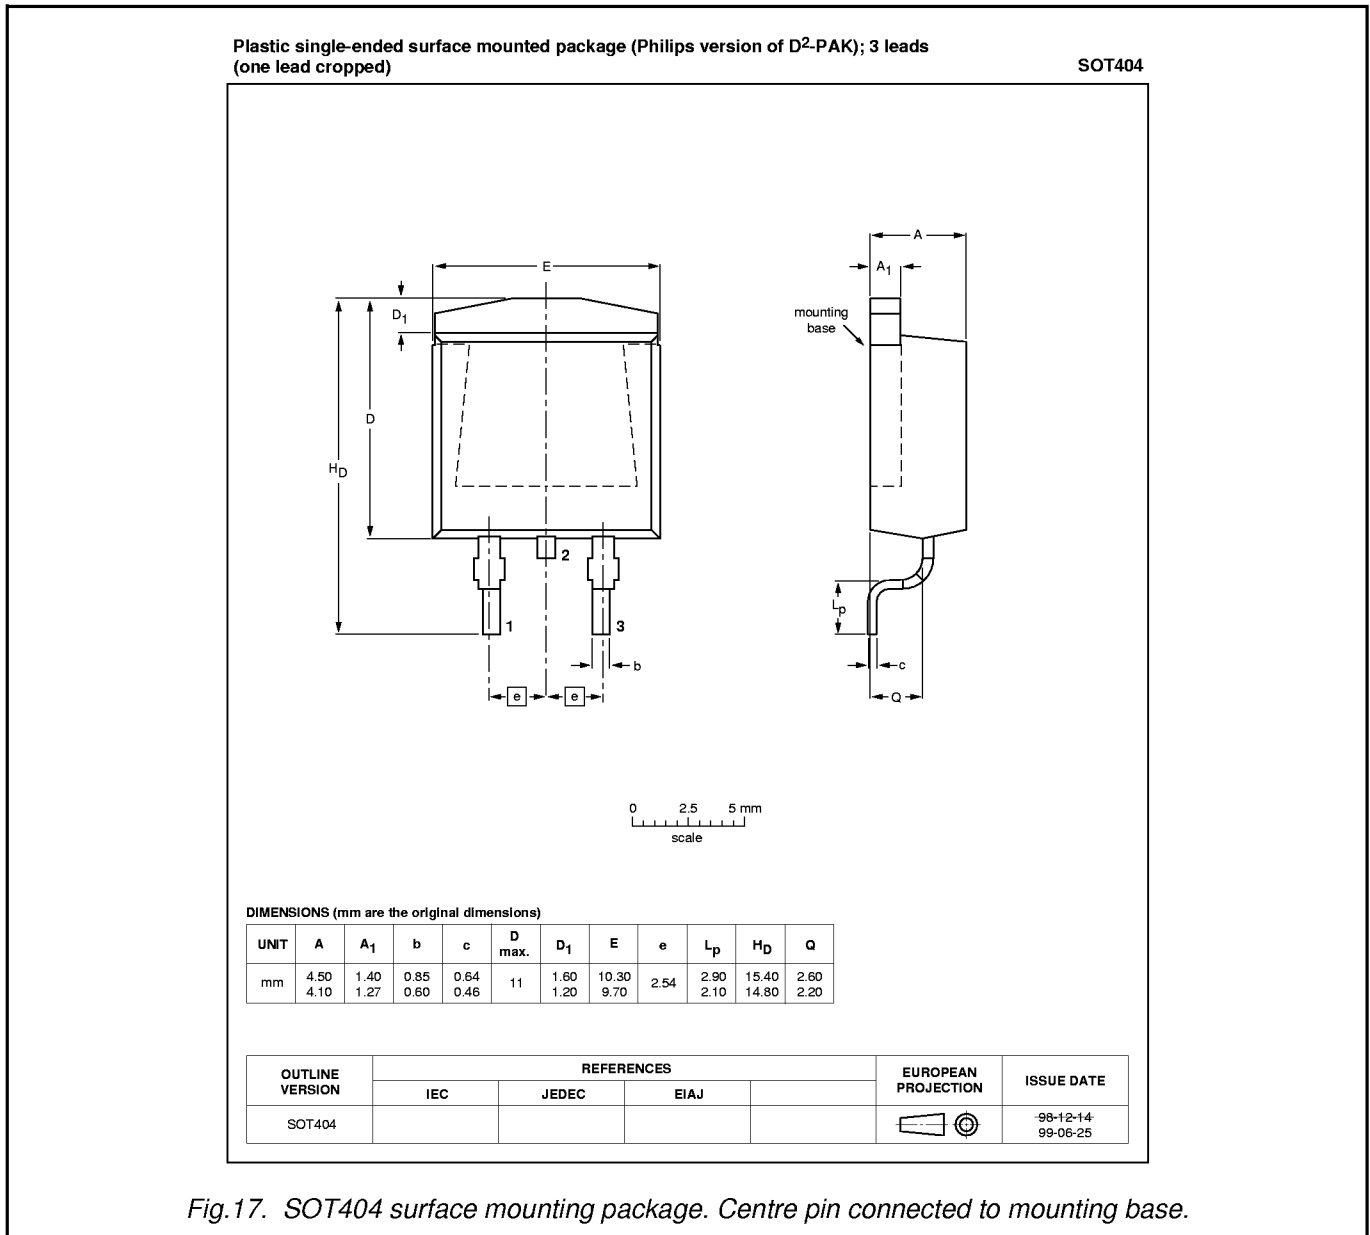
SOT404 surface mounting package. Centre pin connected to mounting base.
